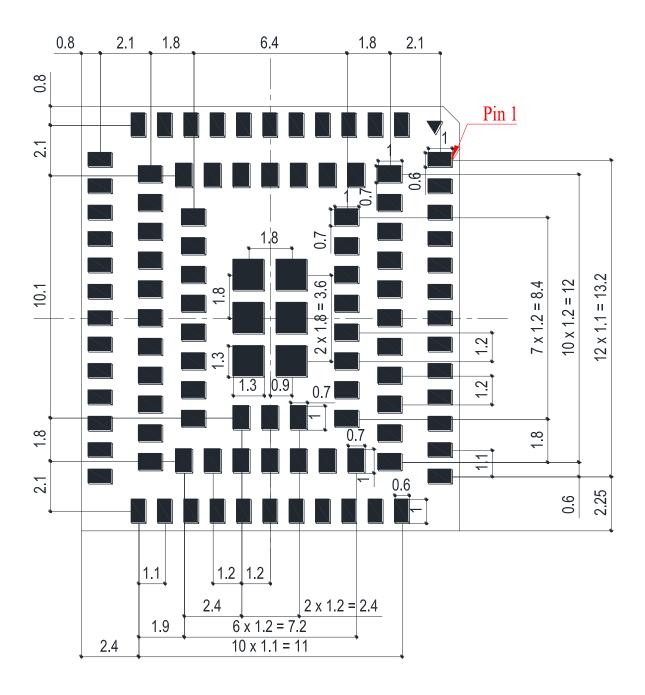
Bottom Dimensions (Bottom View, Unit: mm)
